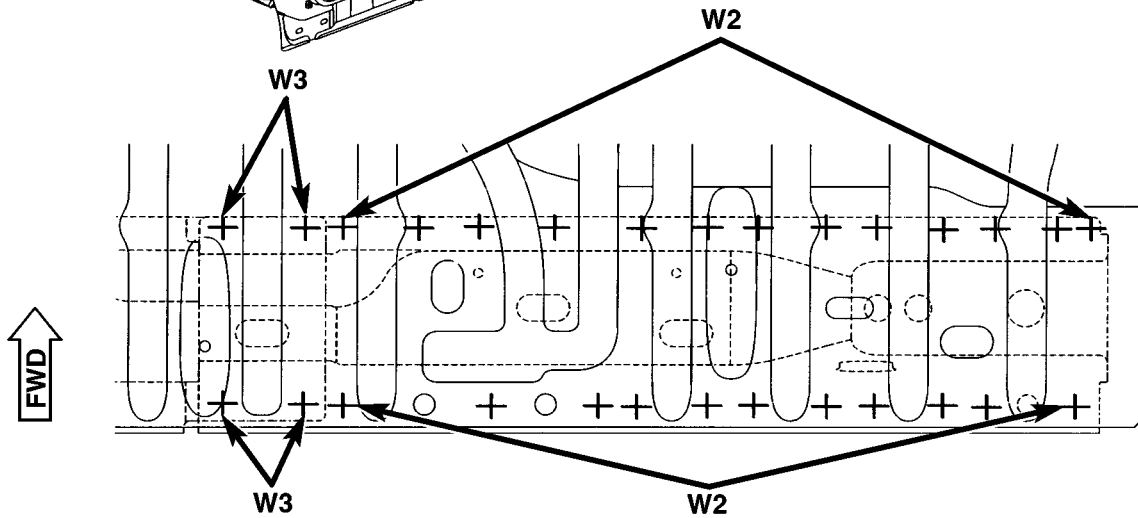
FRONT SEAT MOUNTING CROSSMEMBERS - STANDARD CAB
